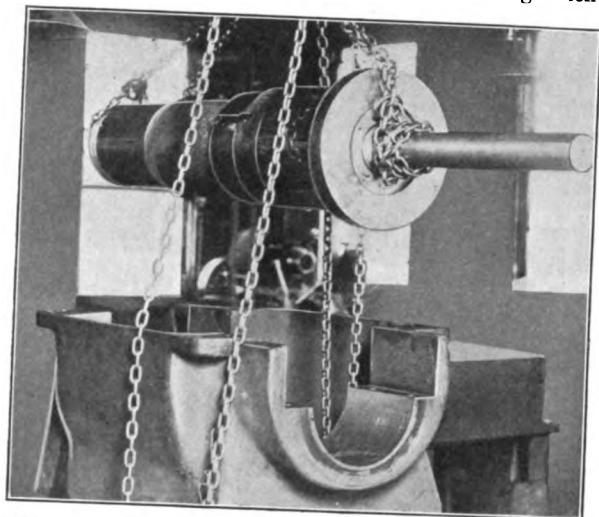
MAIN SPINDLE OF "DODGE" SPECIAL-PURPOSE SHELL LATHE
